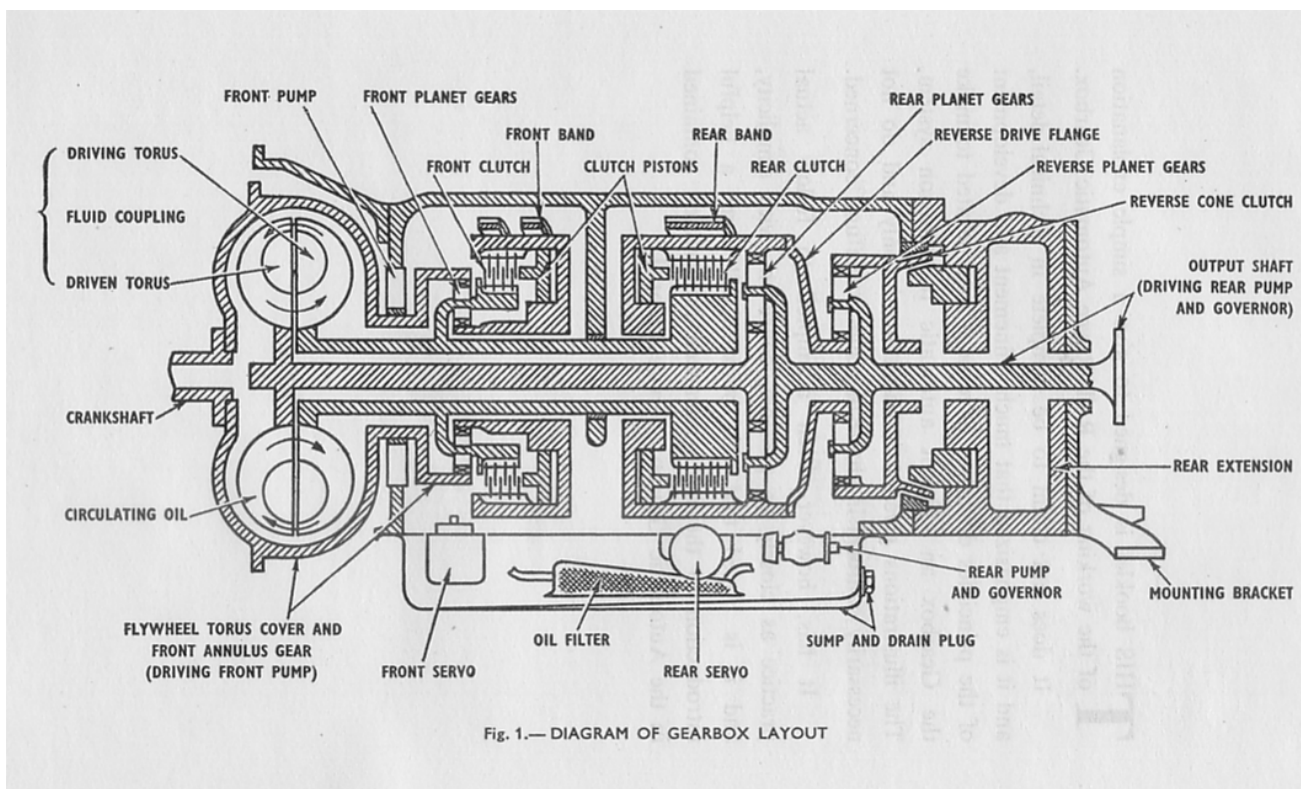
DIAGRAM OF GEARBOX LAYOUT
